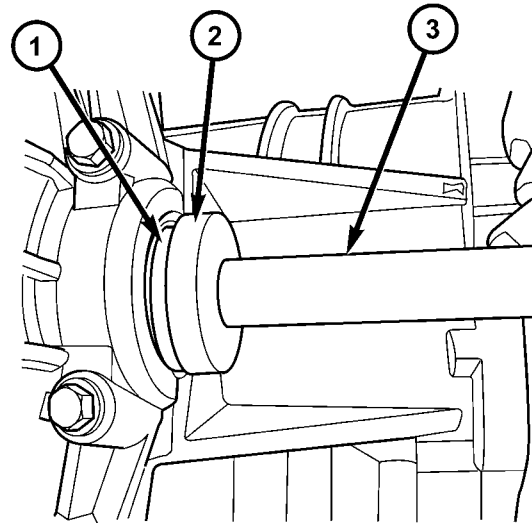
Axle Seal Removal (Extension Housing Side Shown)
